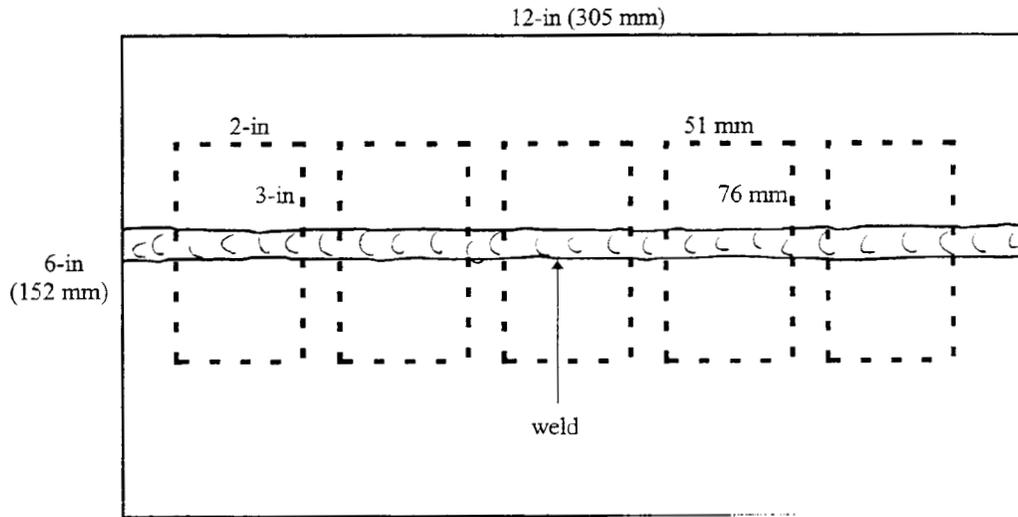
Illustration of how test specimens were cut from welded plates.
